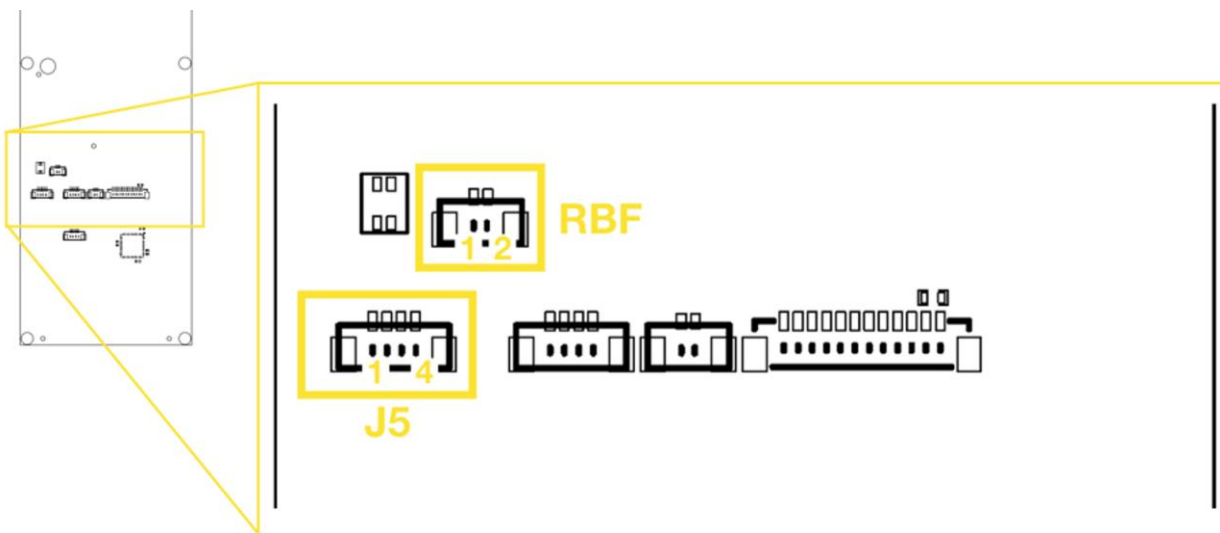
Remove Before Flight (RBF) Connector - Bottom Side
